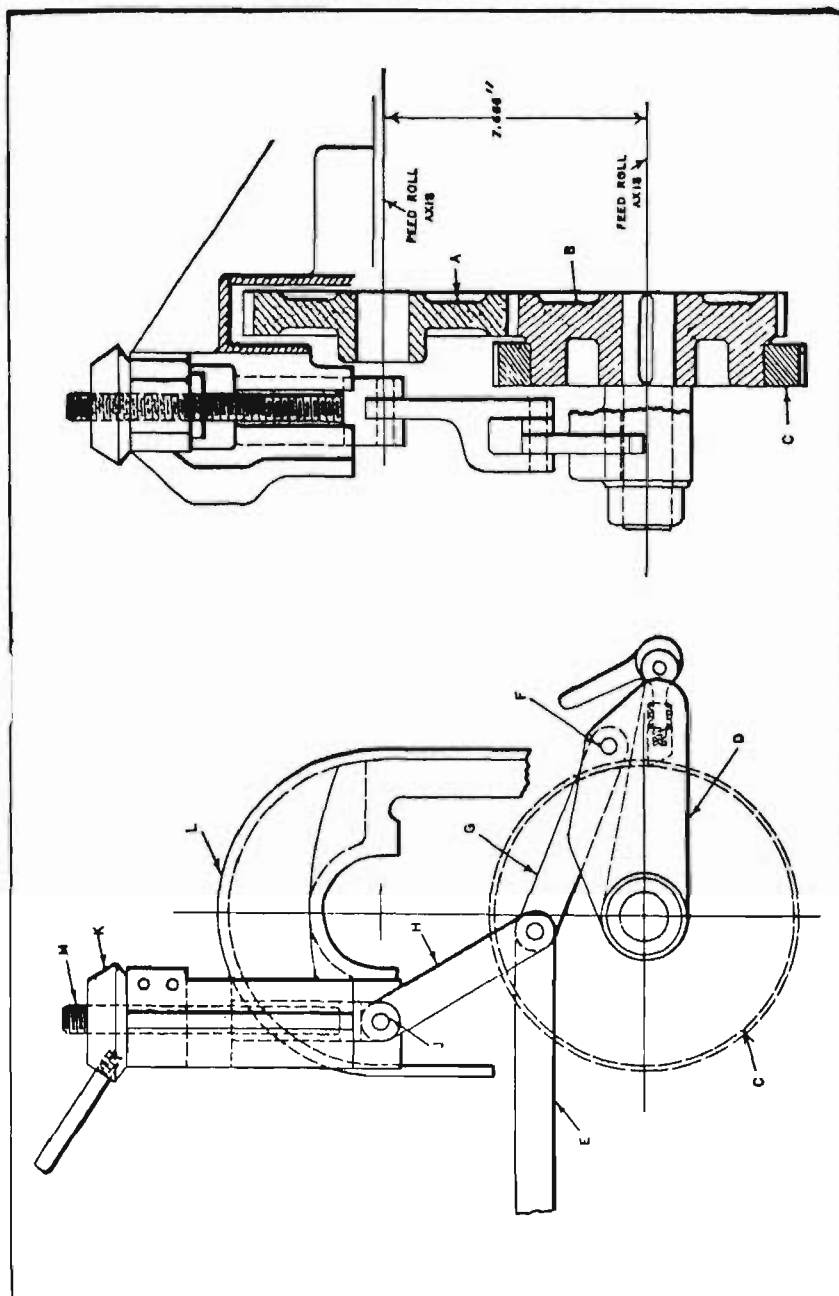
Another Mechanism for Adjusting Ratchet Feeding Movement without Stopping the Machine
